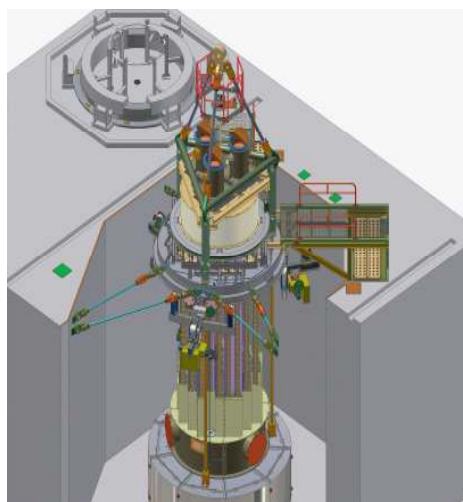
Westinghouse 3 loops Rx vessel head assembly after SHA
